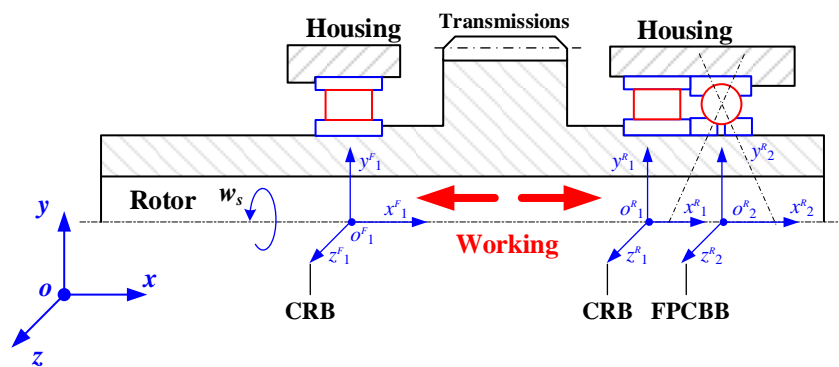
Sketch of a shaft system consisting of CRBs and FPCBB
